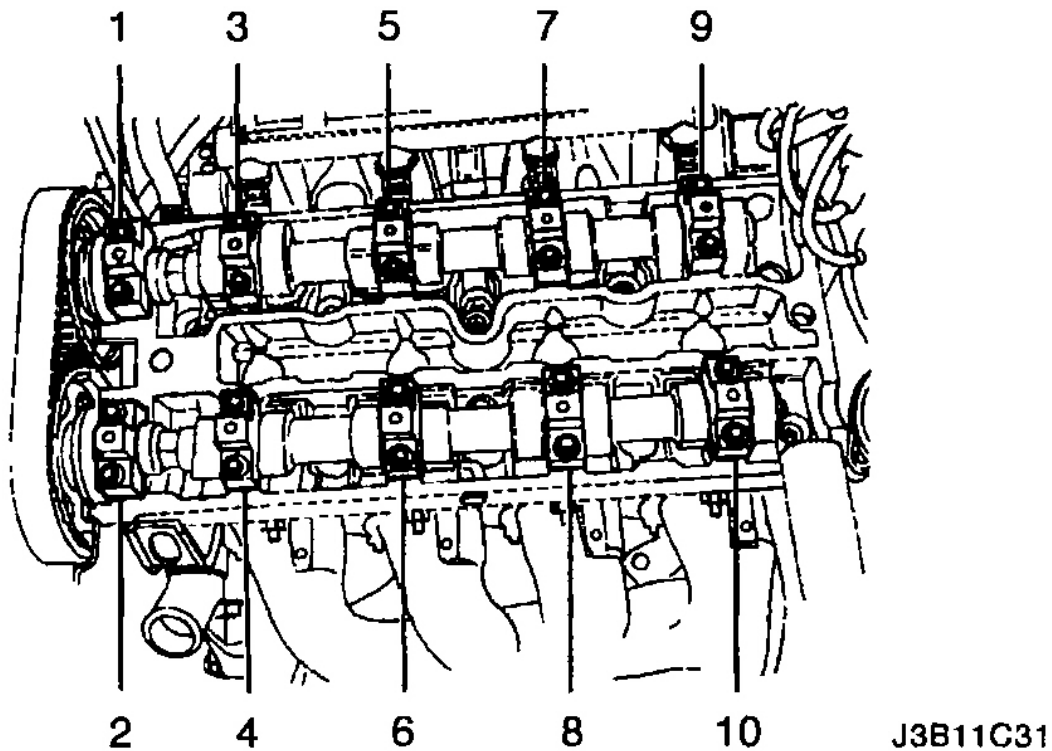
Installing Exhaust Camshaft Cap Bolts
